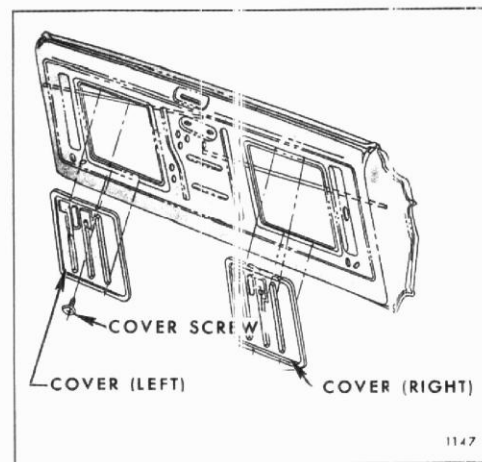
Tail Gate Inner Panel Access Hole Cover
